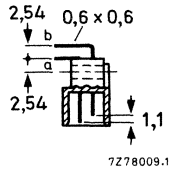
90° angled dip-solder pins, with protruding earth contacts.
